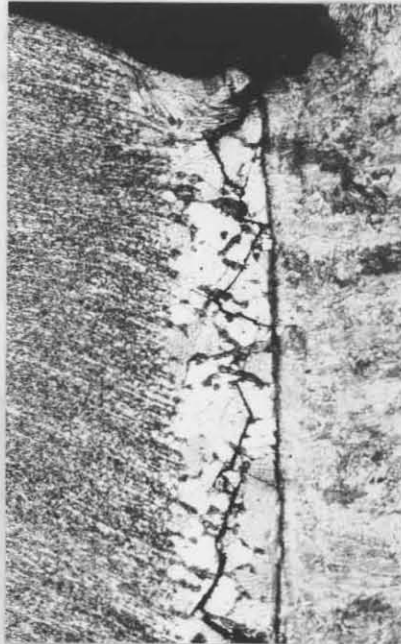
Partially fractured hot rolled bead-on-plate 3CR12 bent specimen welded with an E3CR12 filler metal. Specimen tested at 90°C. Note the plastic deformation lines at the notch tip preceding cleavage fracture (35X).
